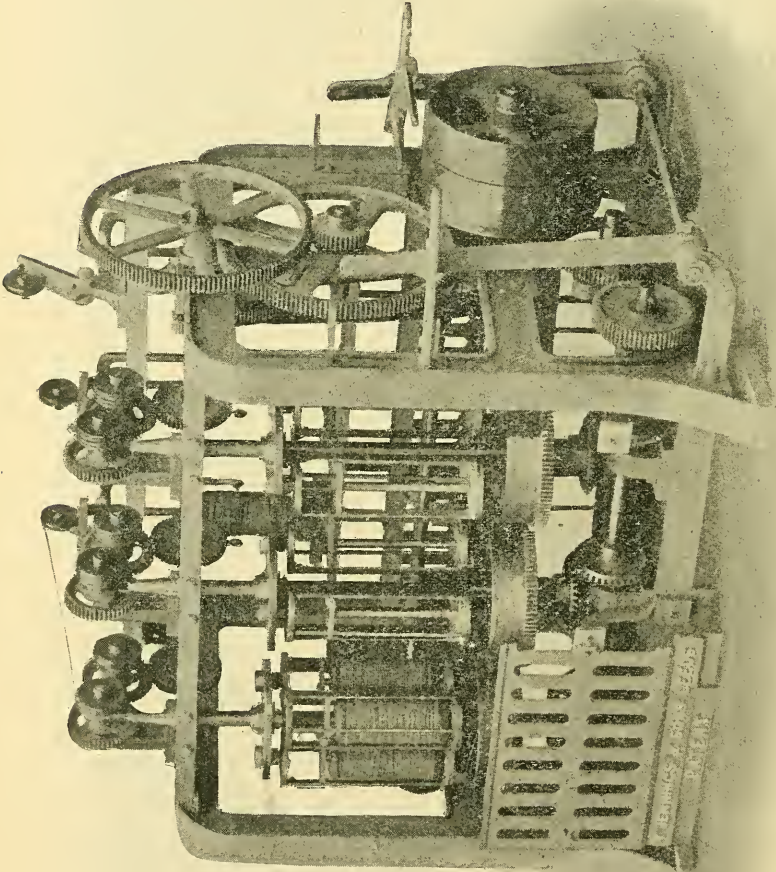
Cabling or laying machine. (Made by T. Jemmings & Sons, Leeds.)
